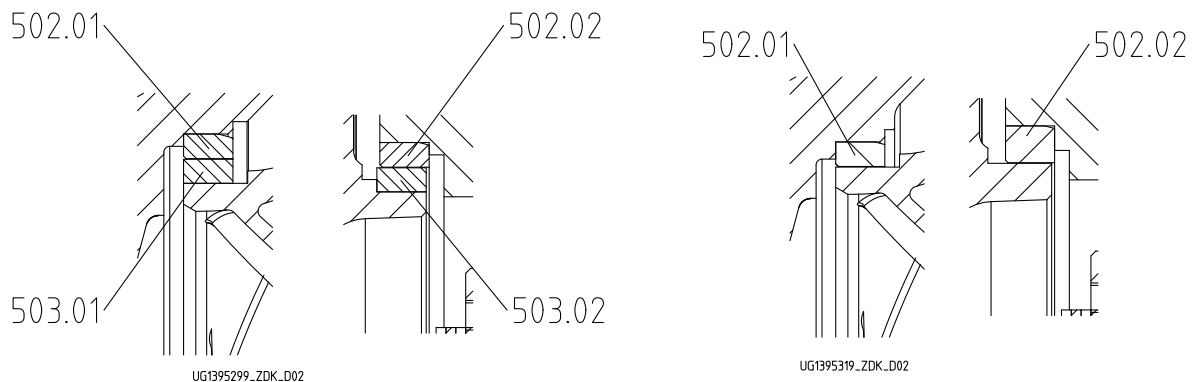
General assembly drawing for version with one mechanical seal and two angular contact ball bearings
